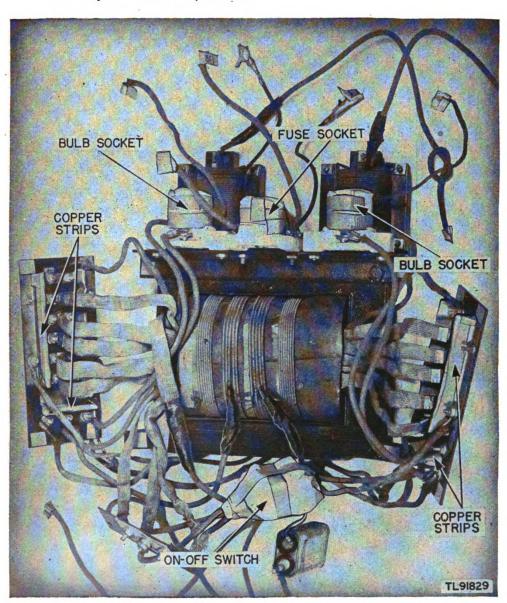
Rectifier RA-36-(1) and rectifier 6RB6B17, masking transformer assembly.
